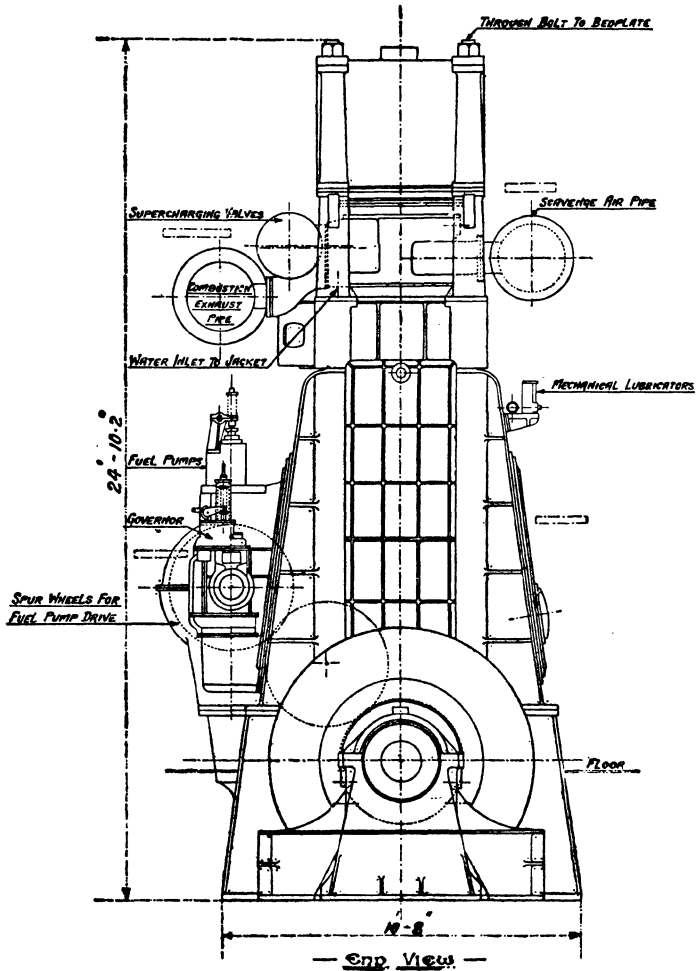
3000 brake h.p. Scotts' Two-stroke Heavy-oil Engine (end view)
